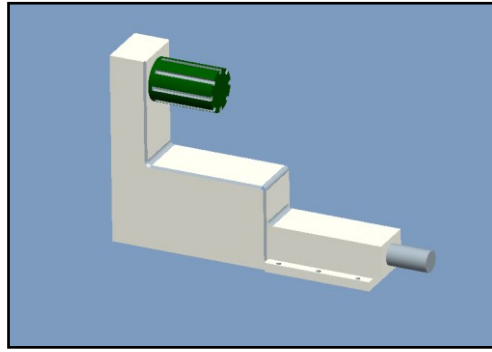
Concept Drawing of Pneumatically Operated Spindle head
